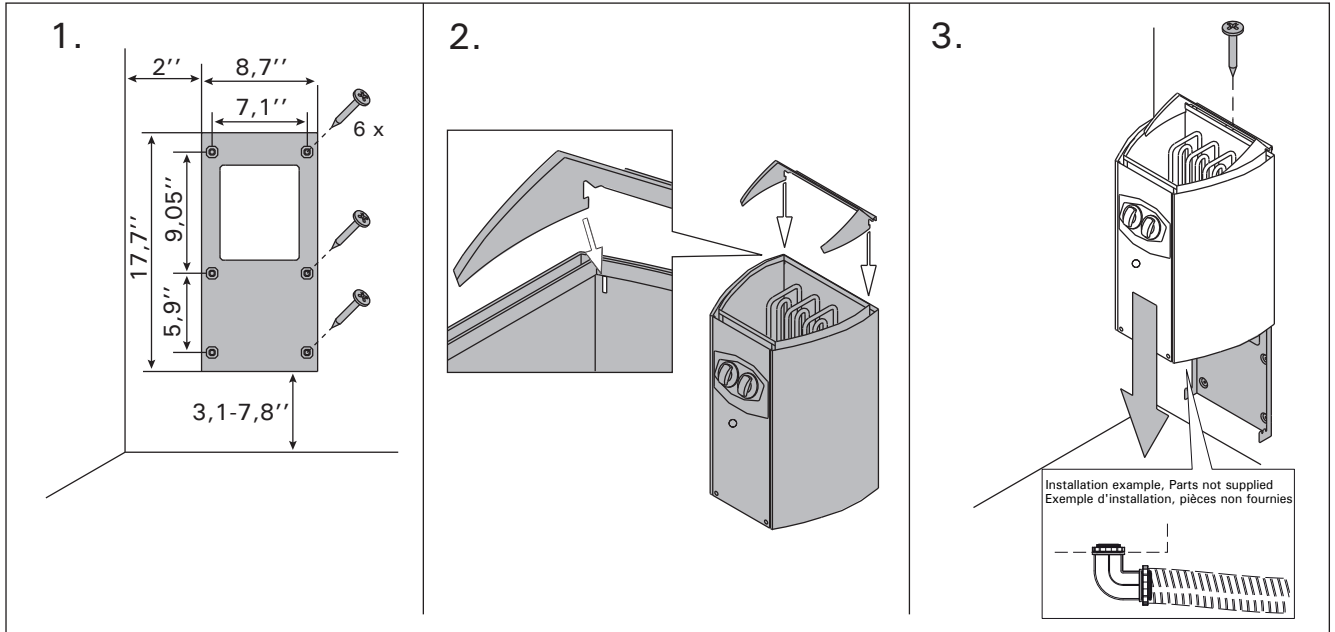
Installing the wall-mounting device (1.) and the heater (2.-3.)
